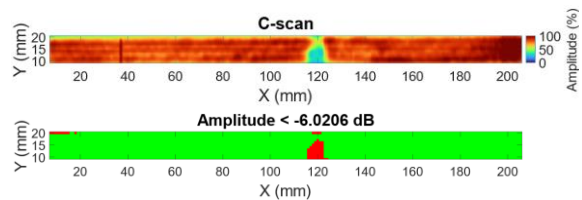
WCUT of a resistance welded coupon in the dimensions of (200.0 x 12.7) mm² with optimized tooling configuration¹
